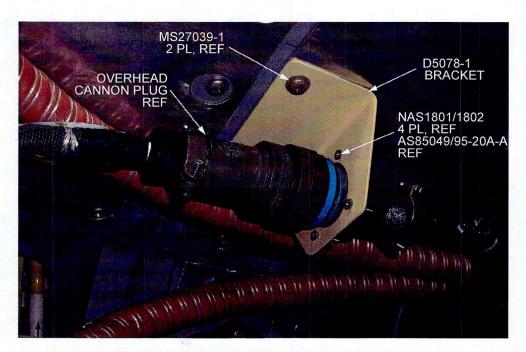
D5078-1 Bracket Installation (RH side shown, LH side opposite)
